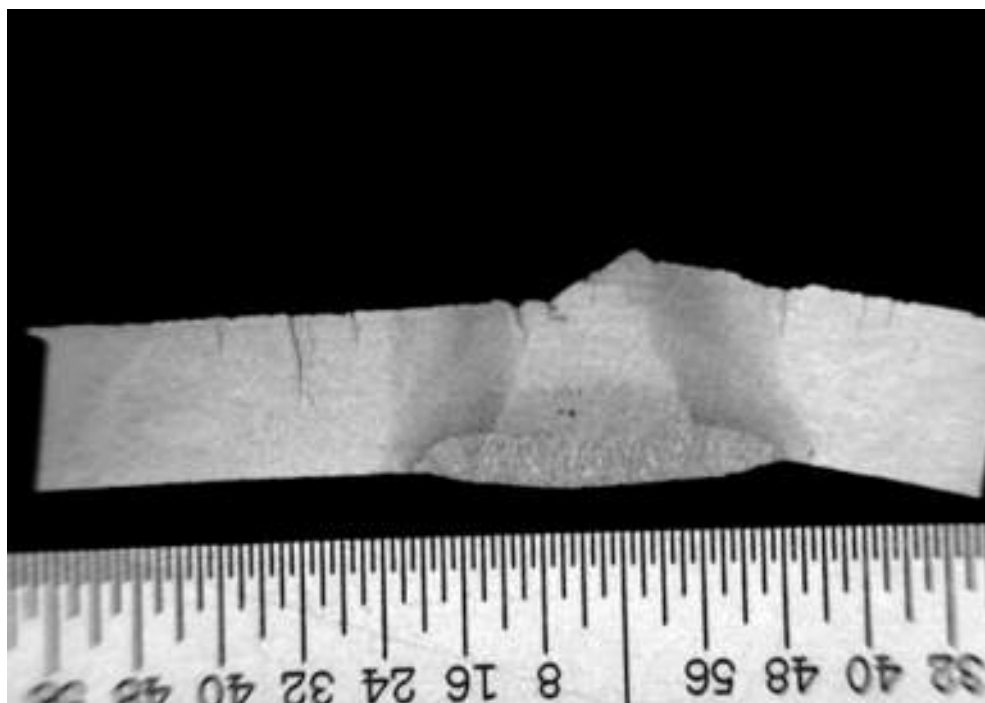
A weld from a 4-in. (100 mm) ASTM A53 reflux line on the main fractionator that leaked after 52 years of service.
